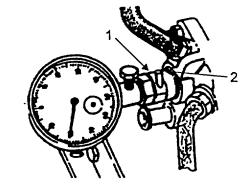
FUEL PUMP AND SPILL DEVICE
